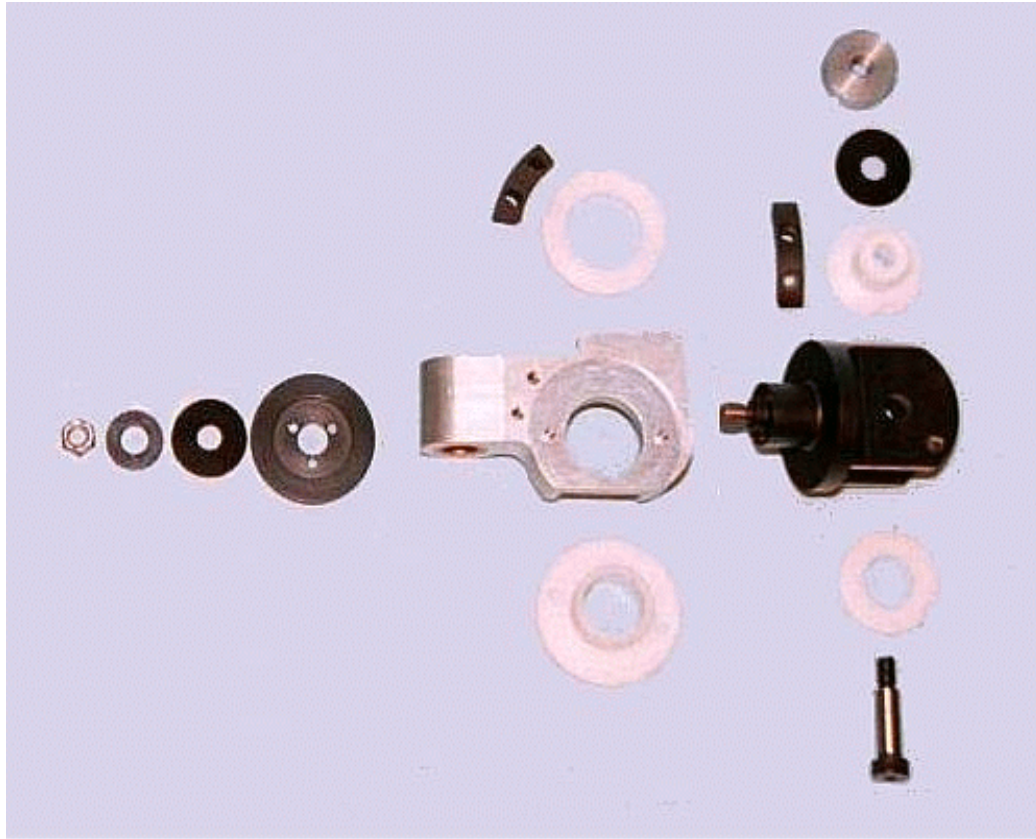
Exploded shoulder yoke to yoke mount assembly
